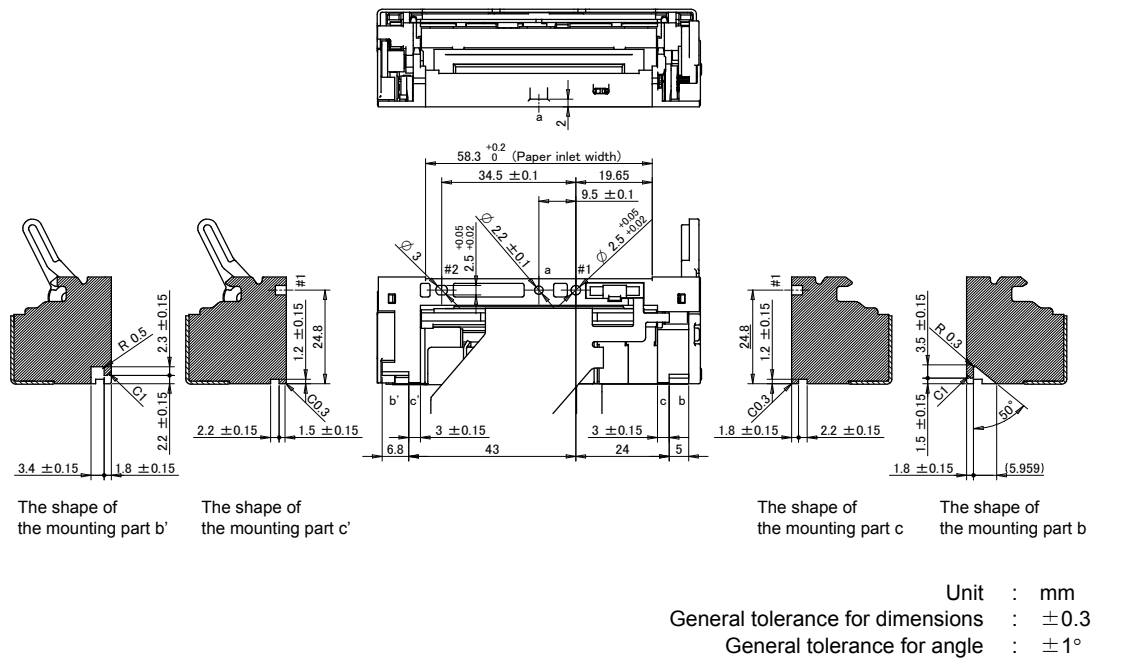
Dimensions for Positioning and Securing the Printer Main Body (CAPD245)
